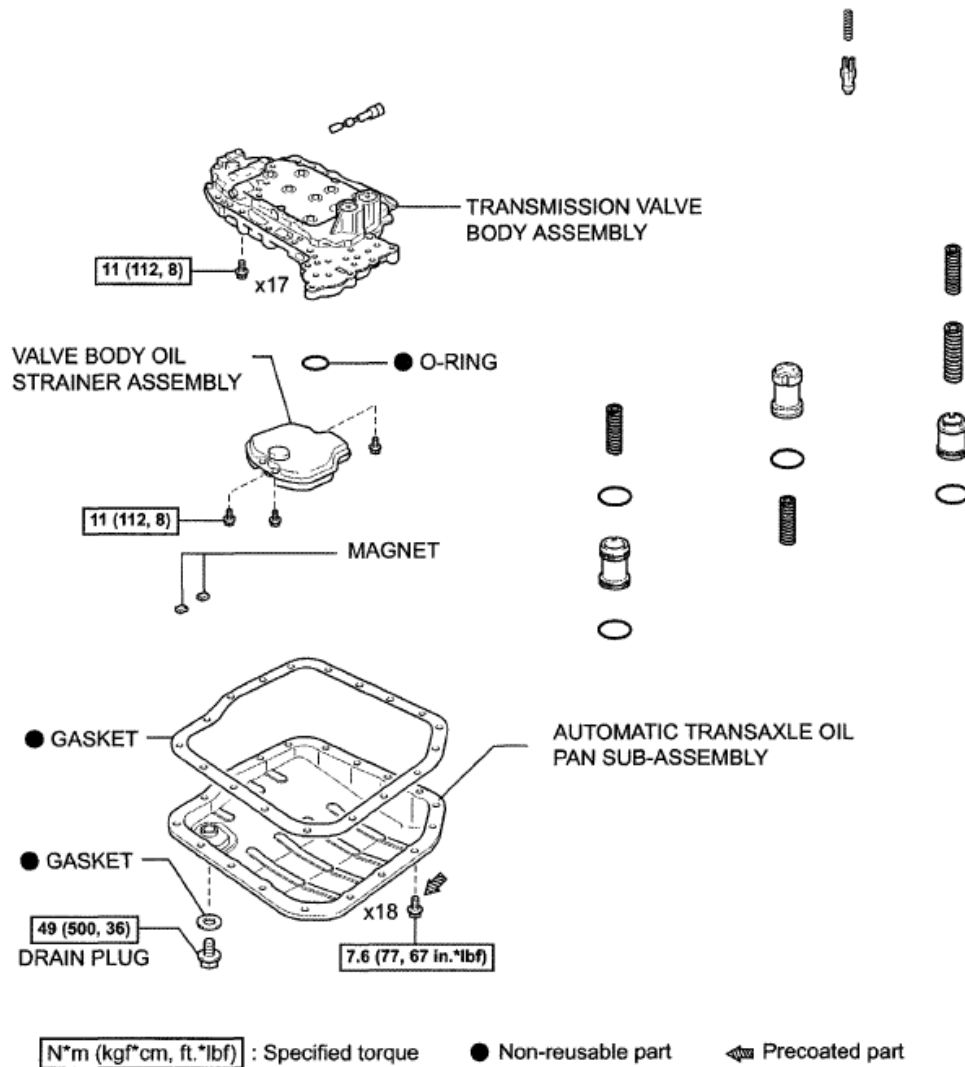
Locating Oil Pan And Gasket With 18 Bolts To Transaxle Case
